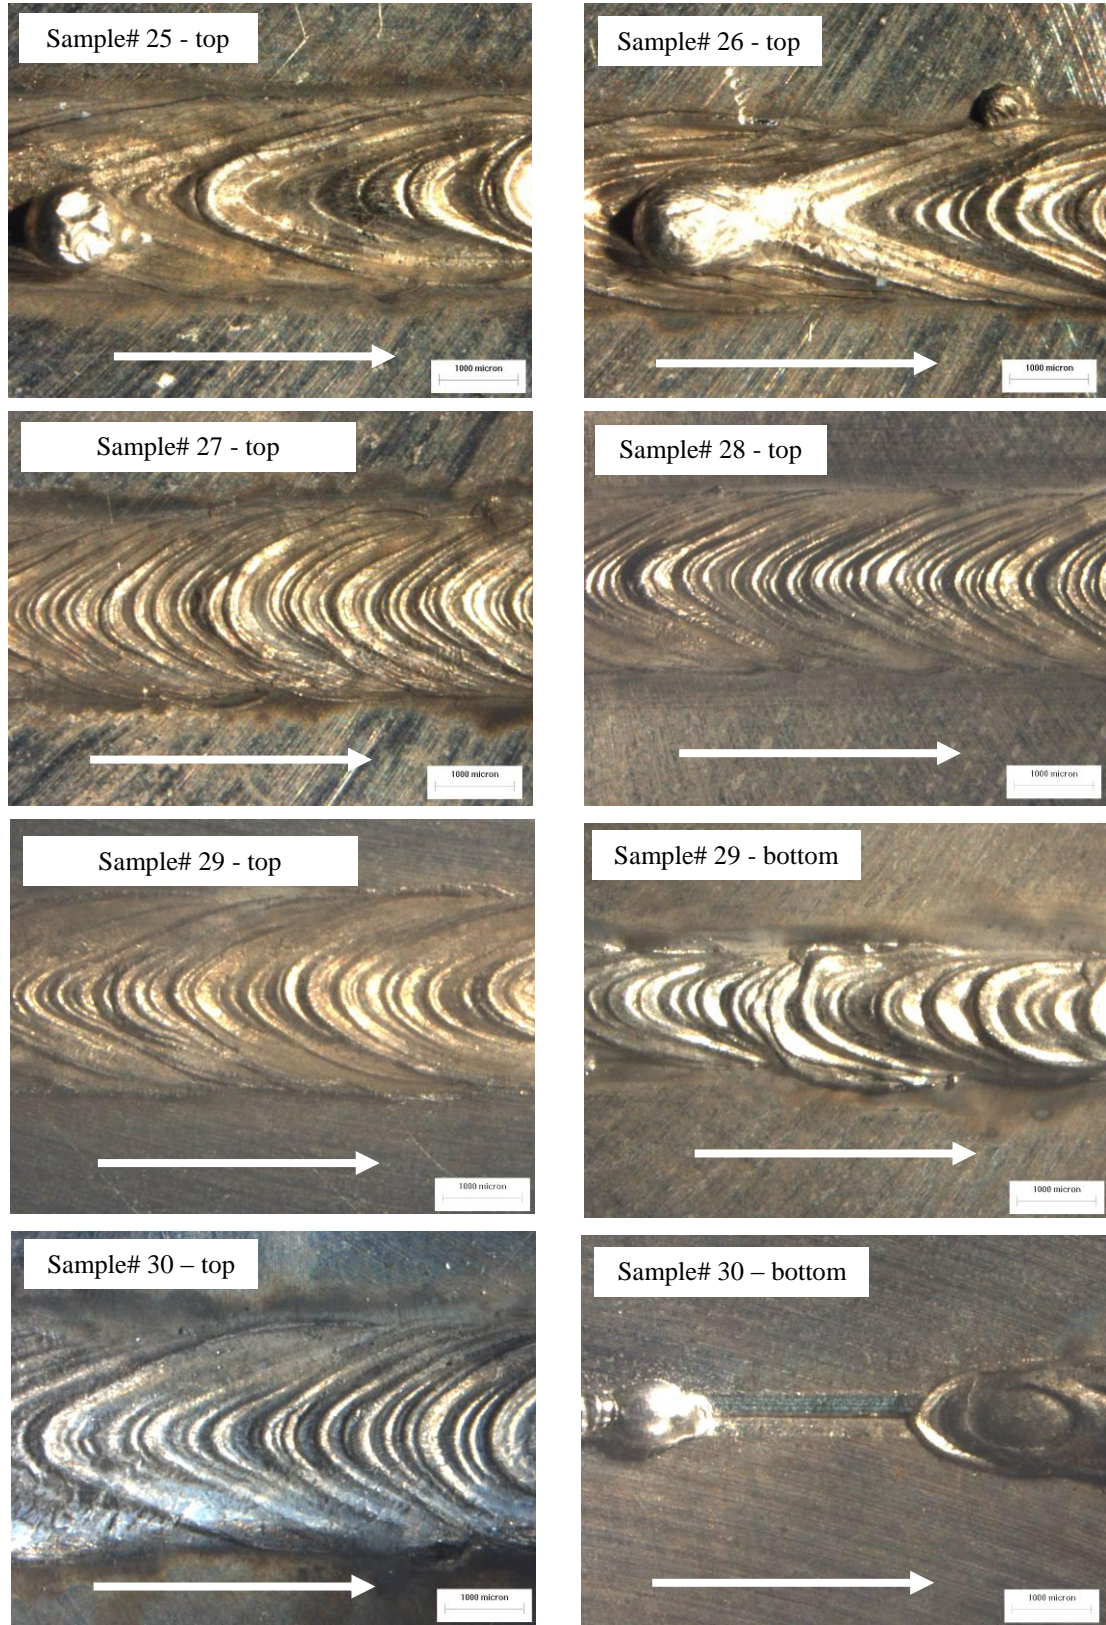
(A) – Top and Bottom Surface Morphology for Laser Welded 6 mm Plates.
